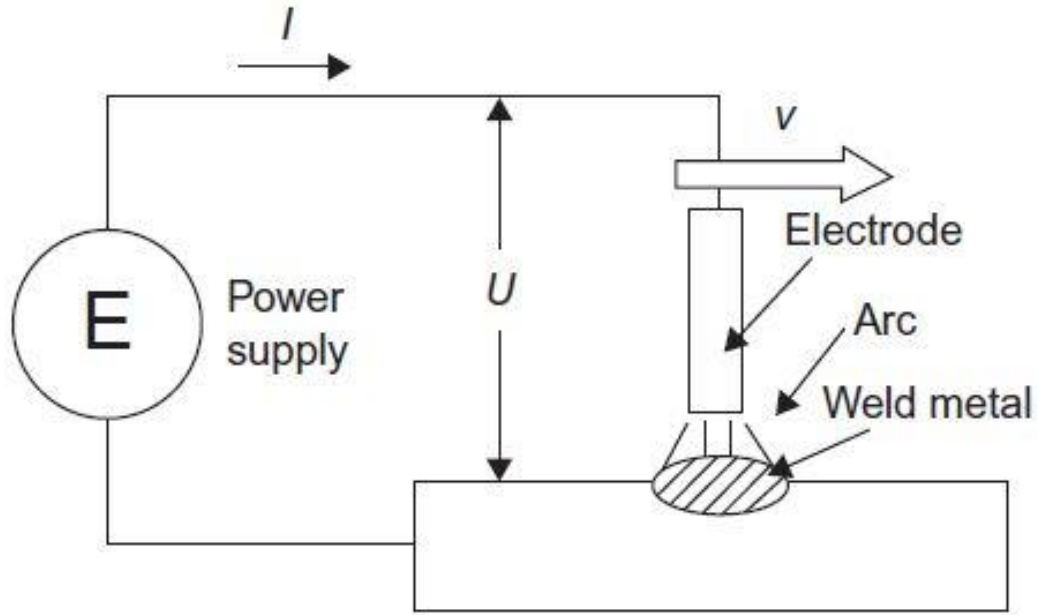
Electric power and welding arc (Ueda and et al., 2012)
